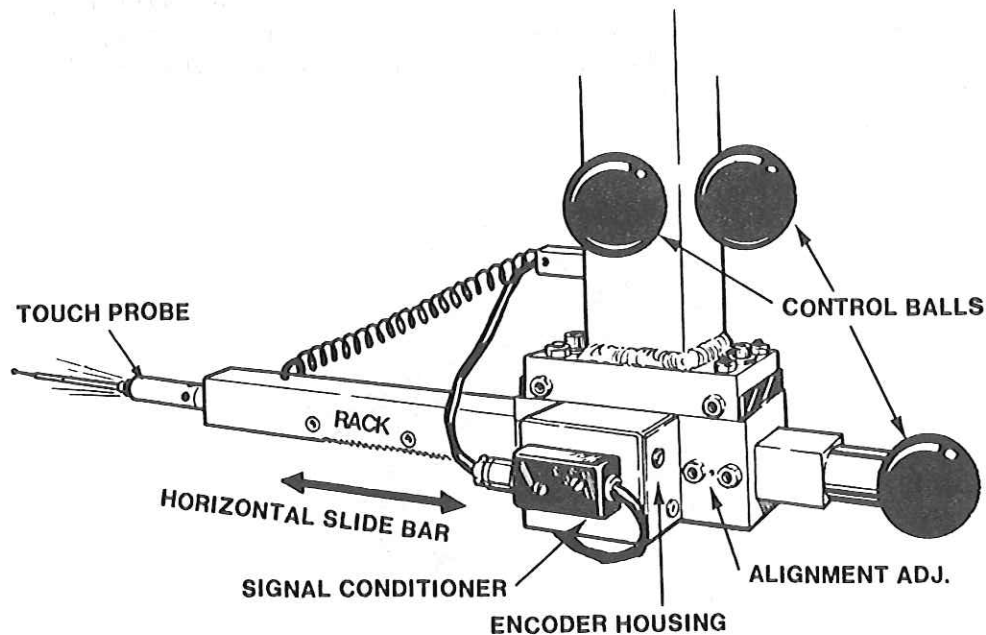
Horizontal slide assembly showing the touch probe and the measurement instrumentation.
